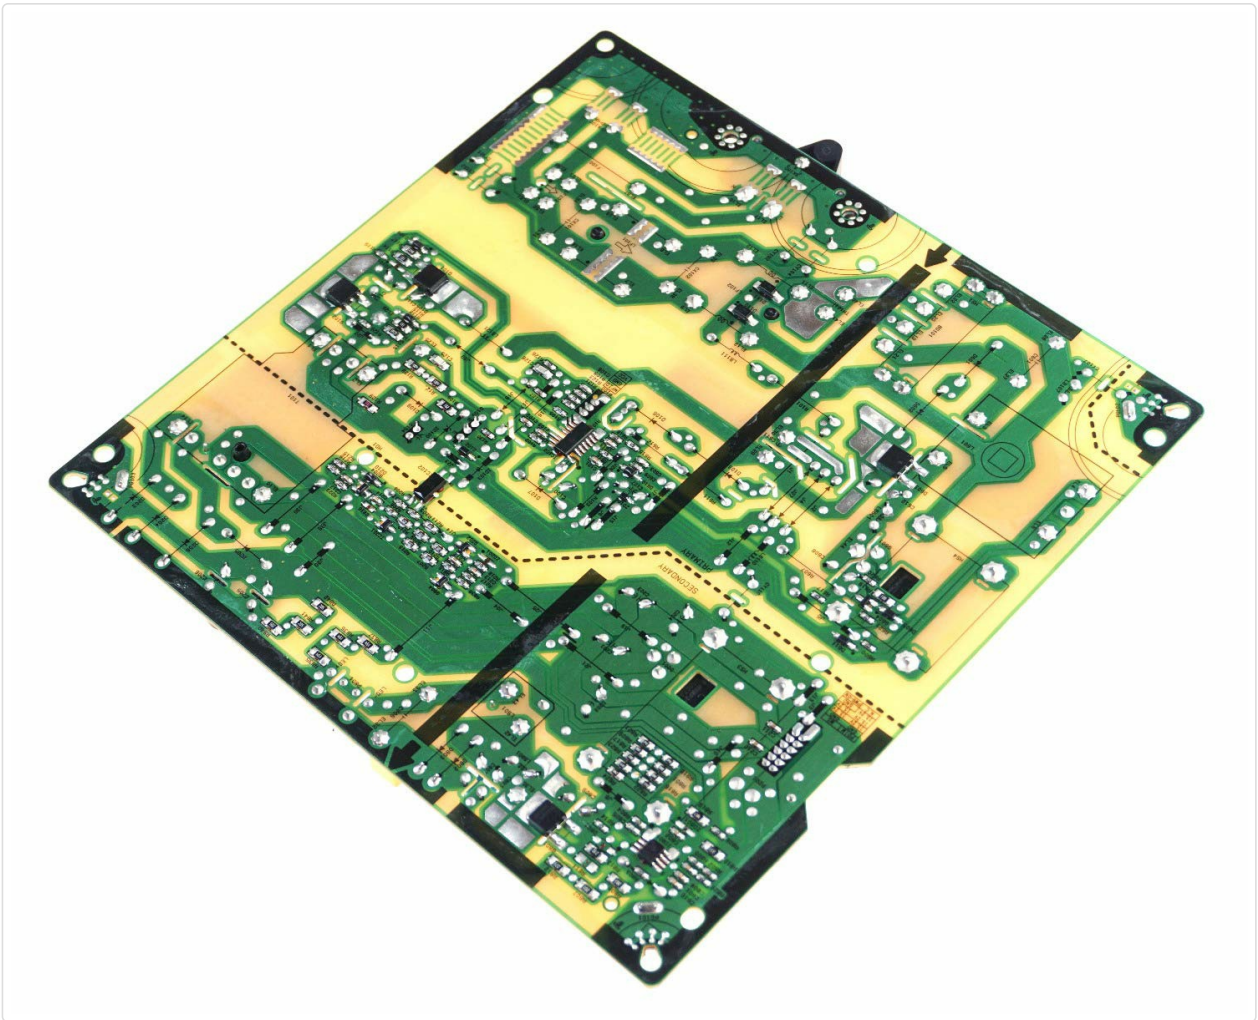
Bottom view of the power supply board, illustrating the circuit traces and solder points. This view is important for understanding the board's internal connections.
